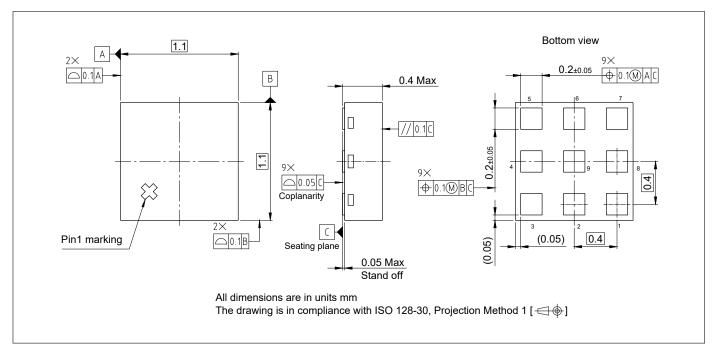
TSNP-9-6 Package Outline (top, side and bottom views)
